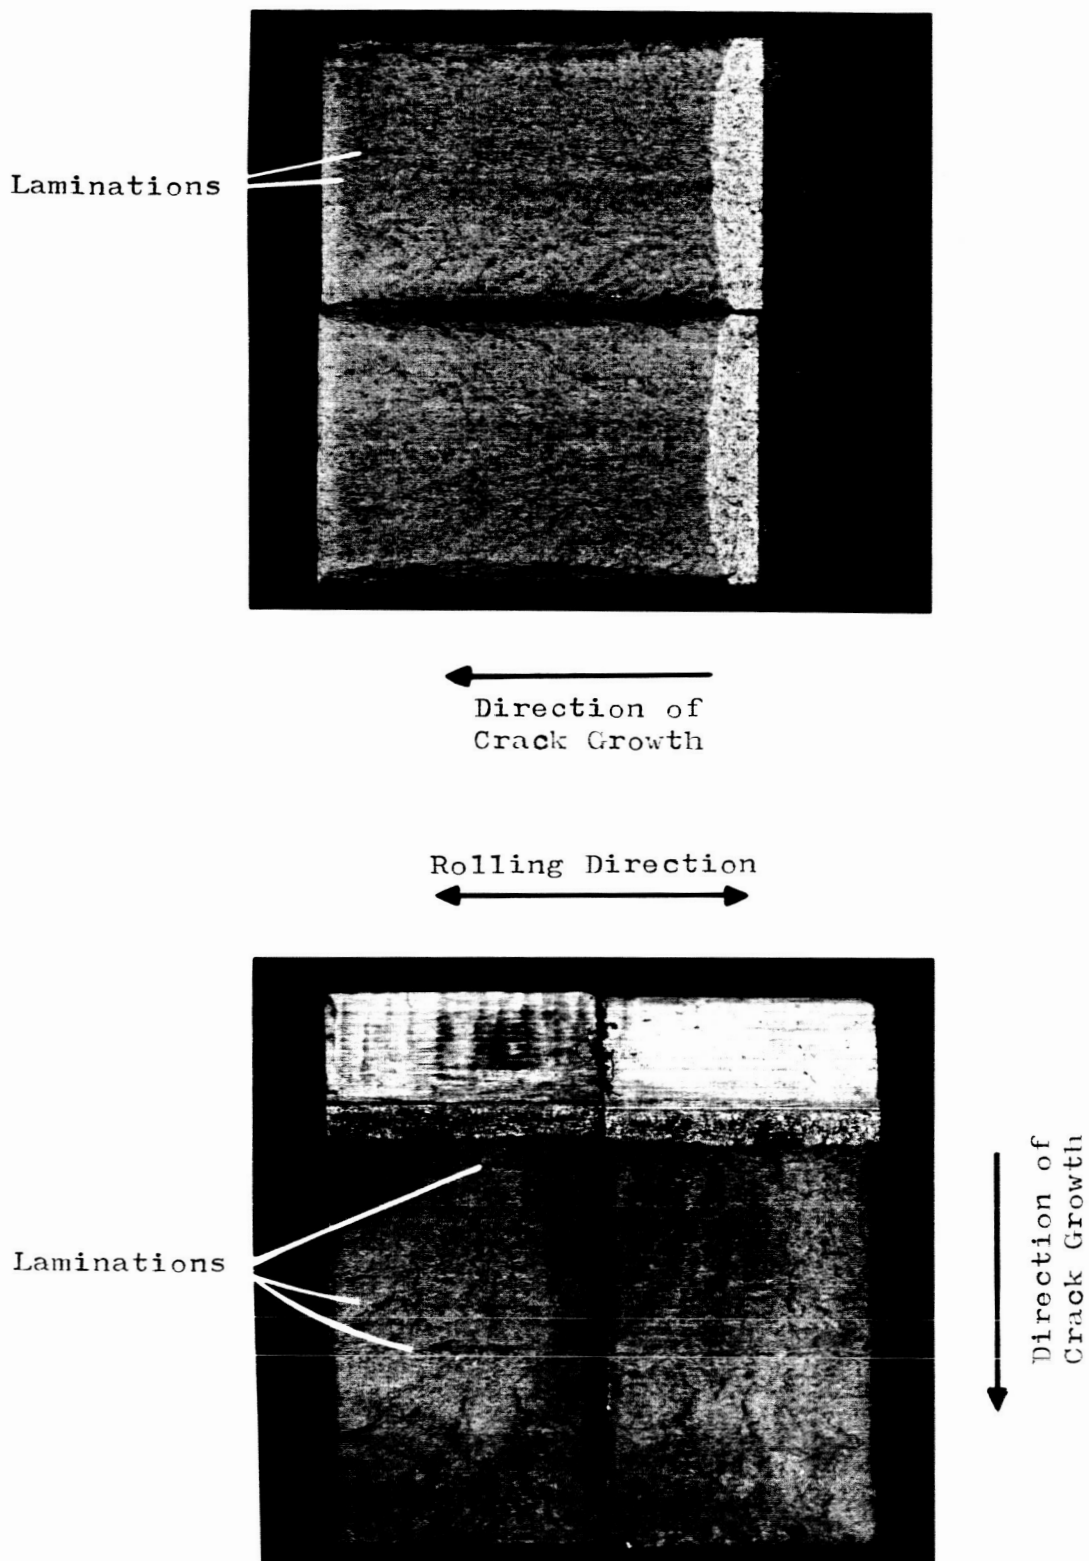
Fracture Surfaces of Bend Specimens showing Delaminations for Cracks Propagating Perpendicular to the Rolling Plane of the Plate
